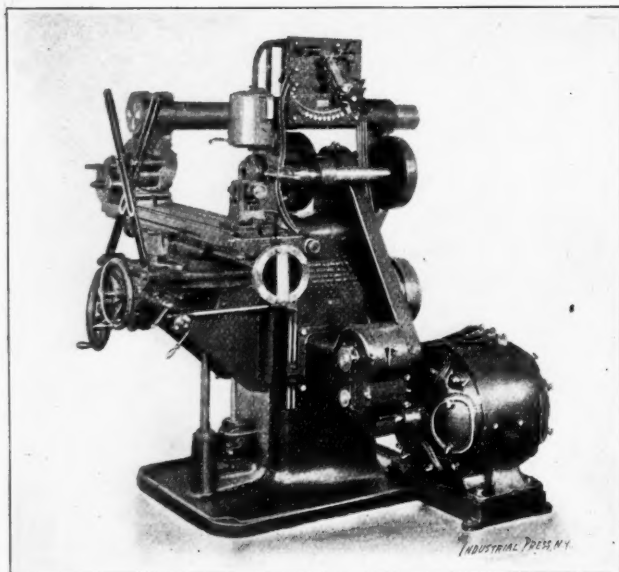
Brown & Sharpe Universal Milling Machine, Renold Chain Drive Encased.
